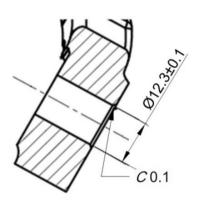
Section of hole 12.3 mm of brake caliper drawing [19]
